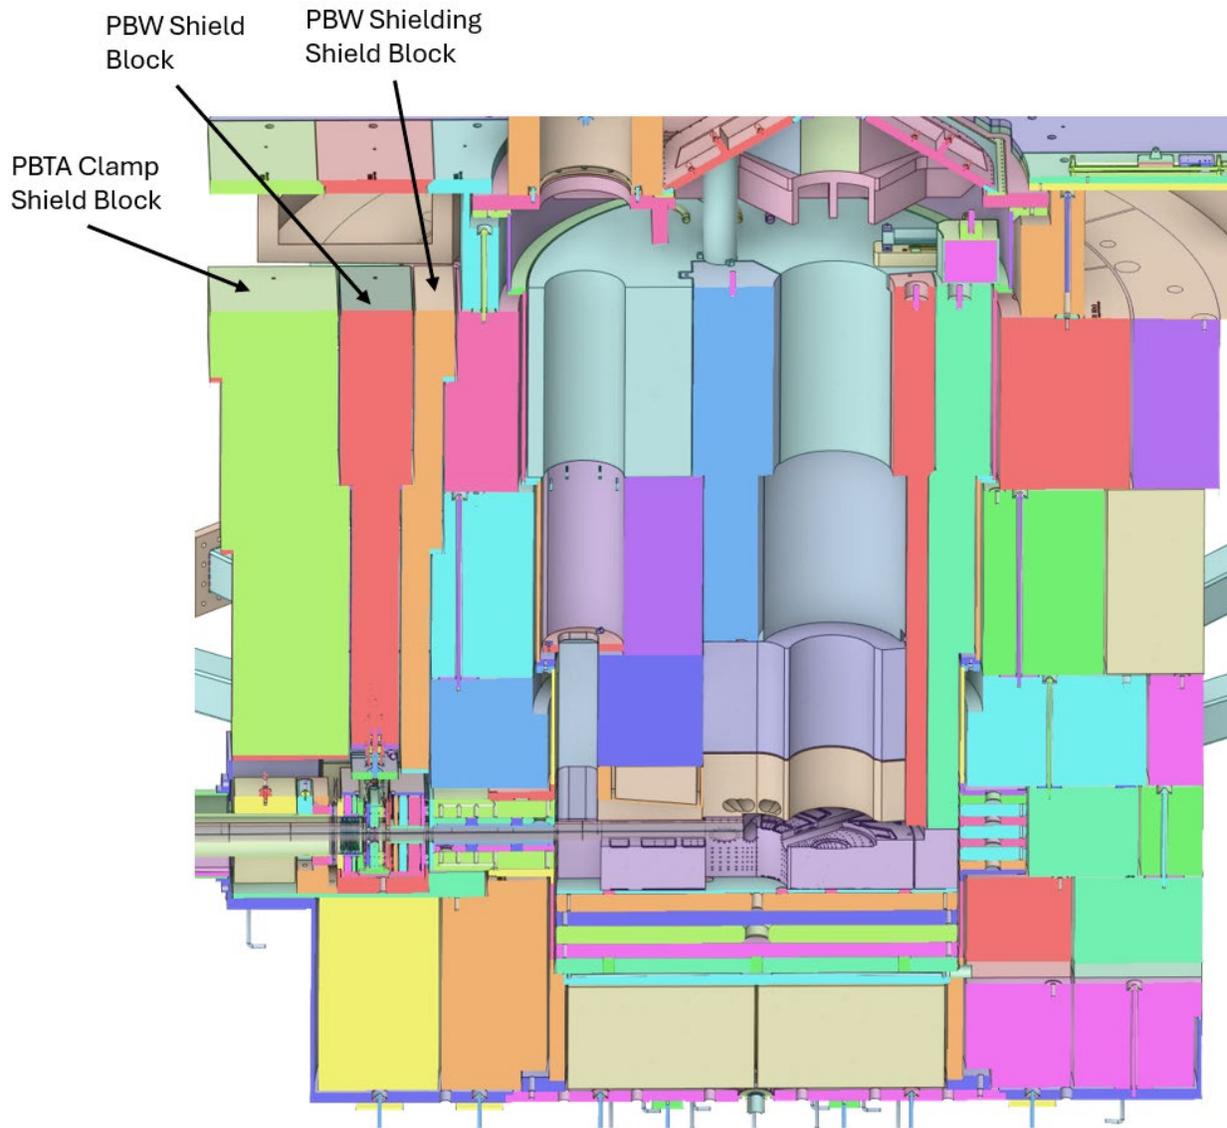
CAD section view of TSS and CV with AIC removable shielding installed
